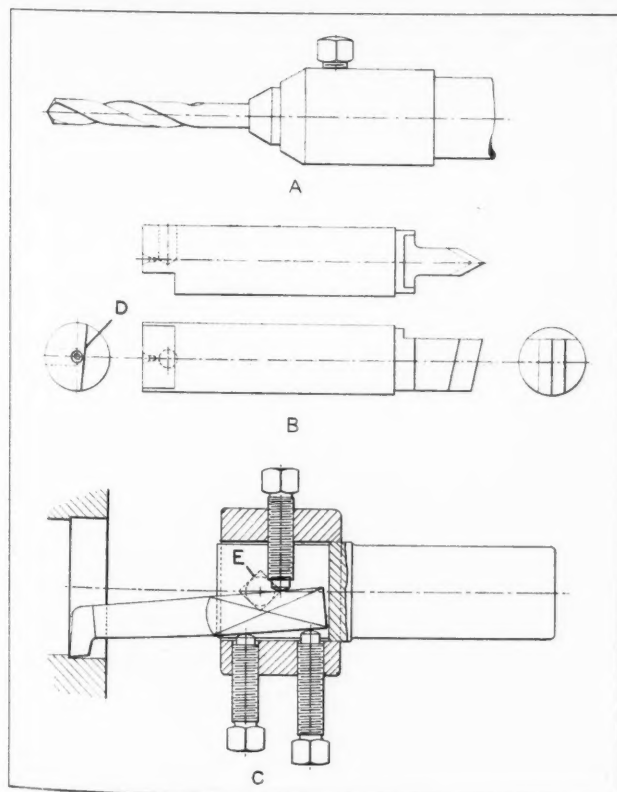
Holders for Drills, Threading Tools, and Boring Tools
